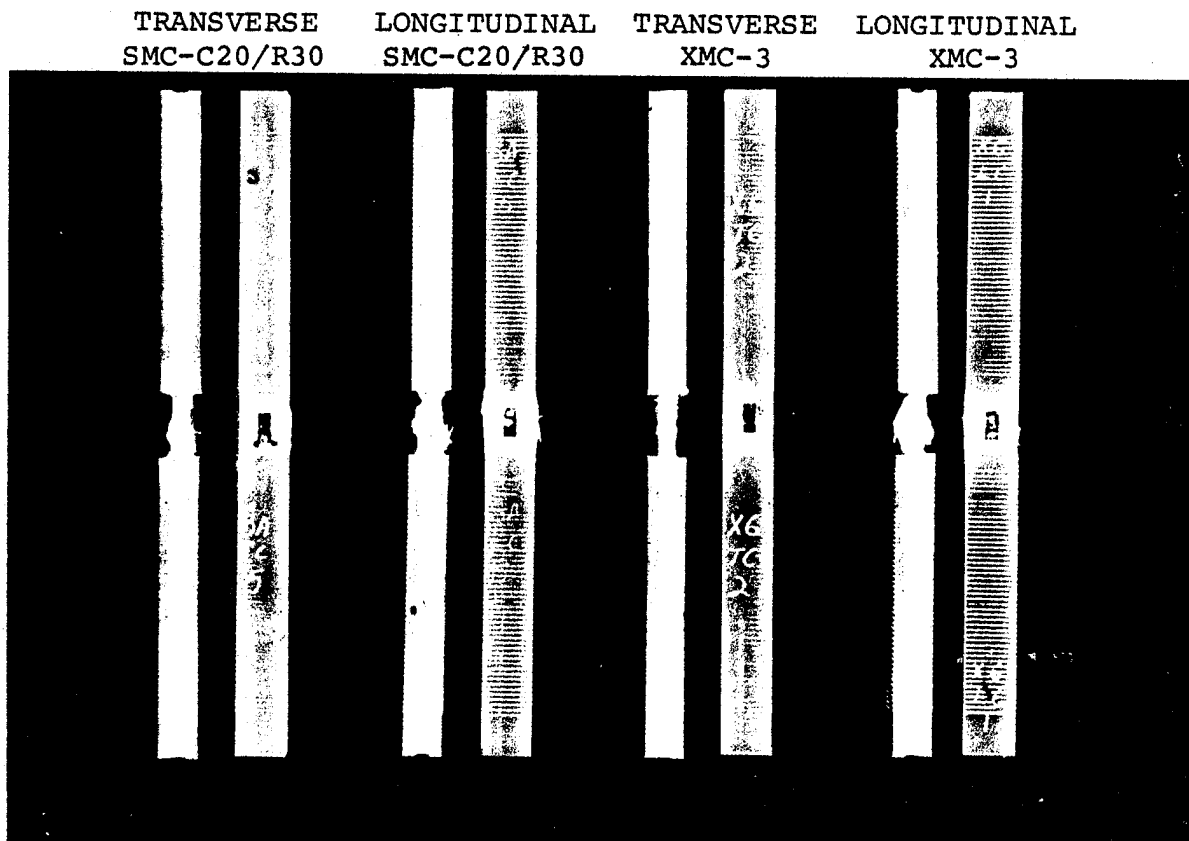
FRACTURED COMPRESSIVE SPECIMENS
